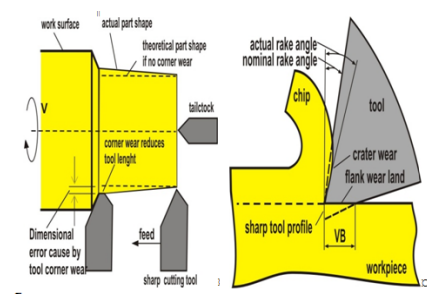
The way of work piece clamping and position of metal-cutting tool against work piece
